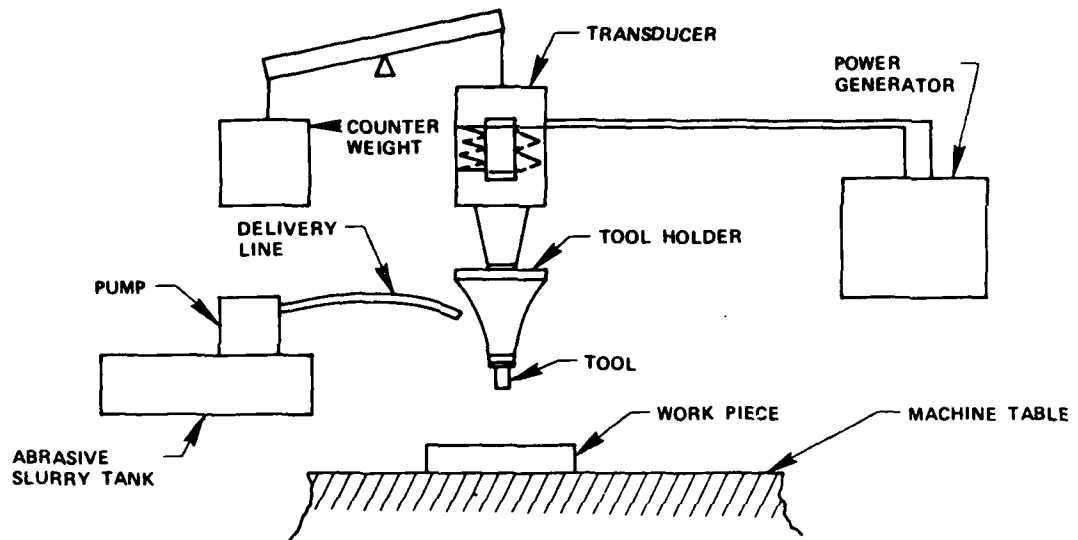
Schematic Illustrating Ultrasonic Machining.
